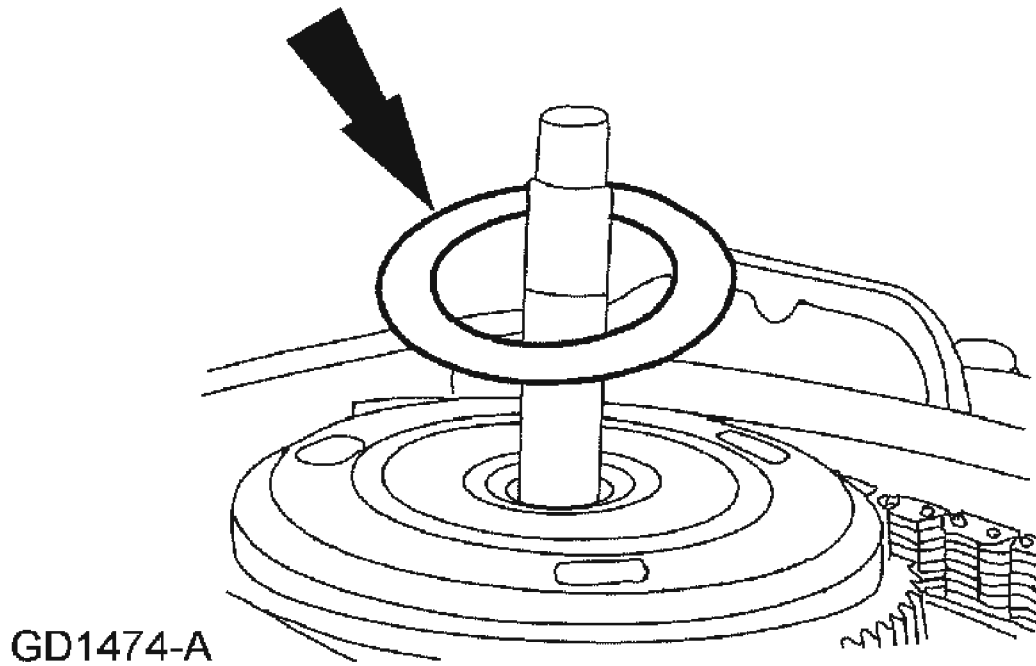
Removing No 13 Driven Sprocket Thrust Bearing
